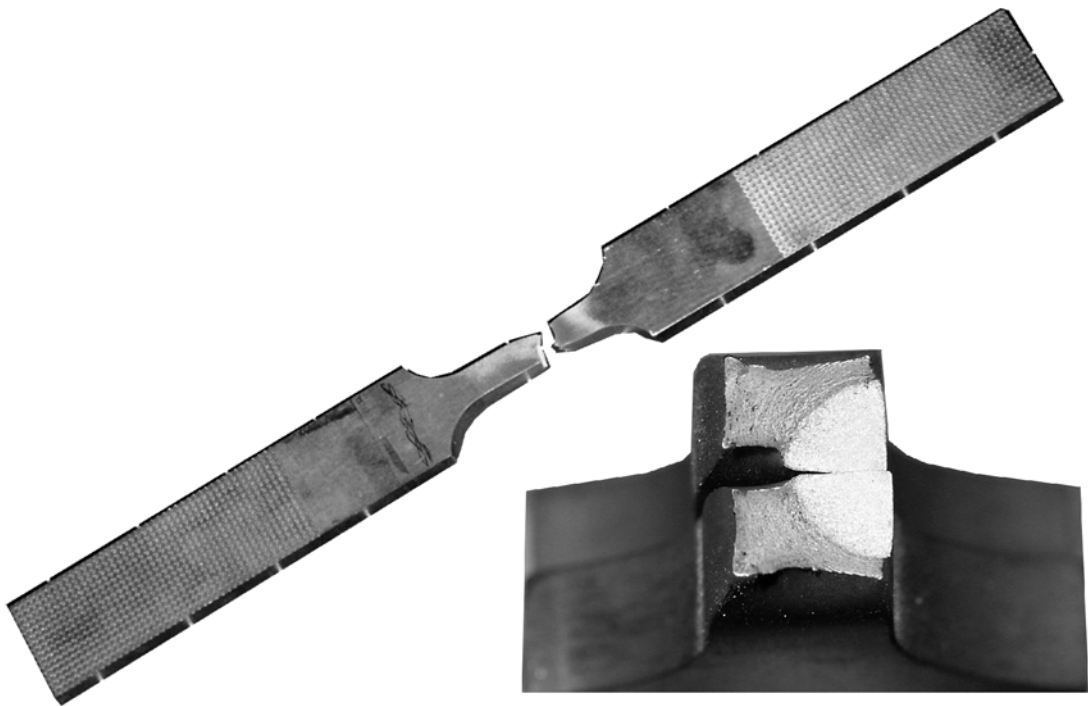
Typical Fractured Smooth Fatigue Specimen
